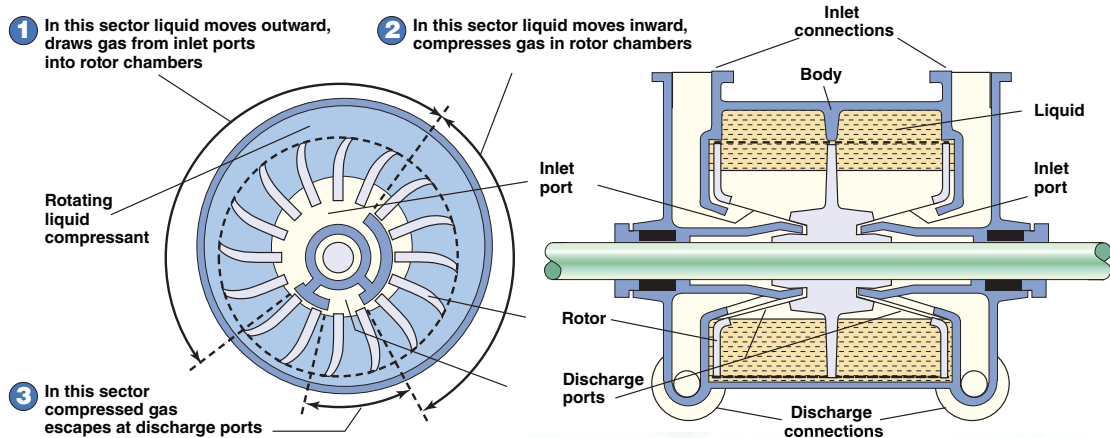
This figure shows a cross-sectional view (above) and general view of assembly (right) of a liquid-ring vacuum pump (Reprinted with permission from Ref. 1)
